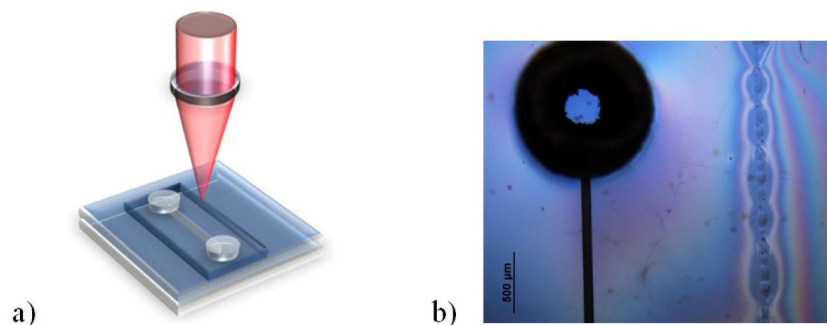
a) Schematic view of the fs-laser welding process adopted to seal the microfluidic device; b) microscope image (top view) of the welding seam surrounding the microfluidic channel and a reservoir.
